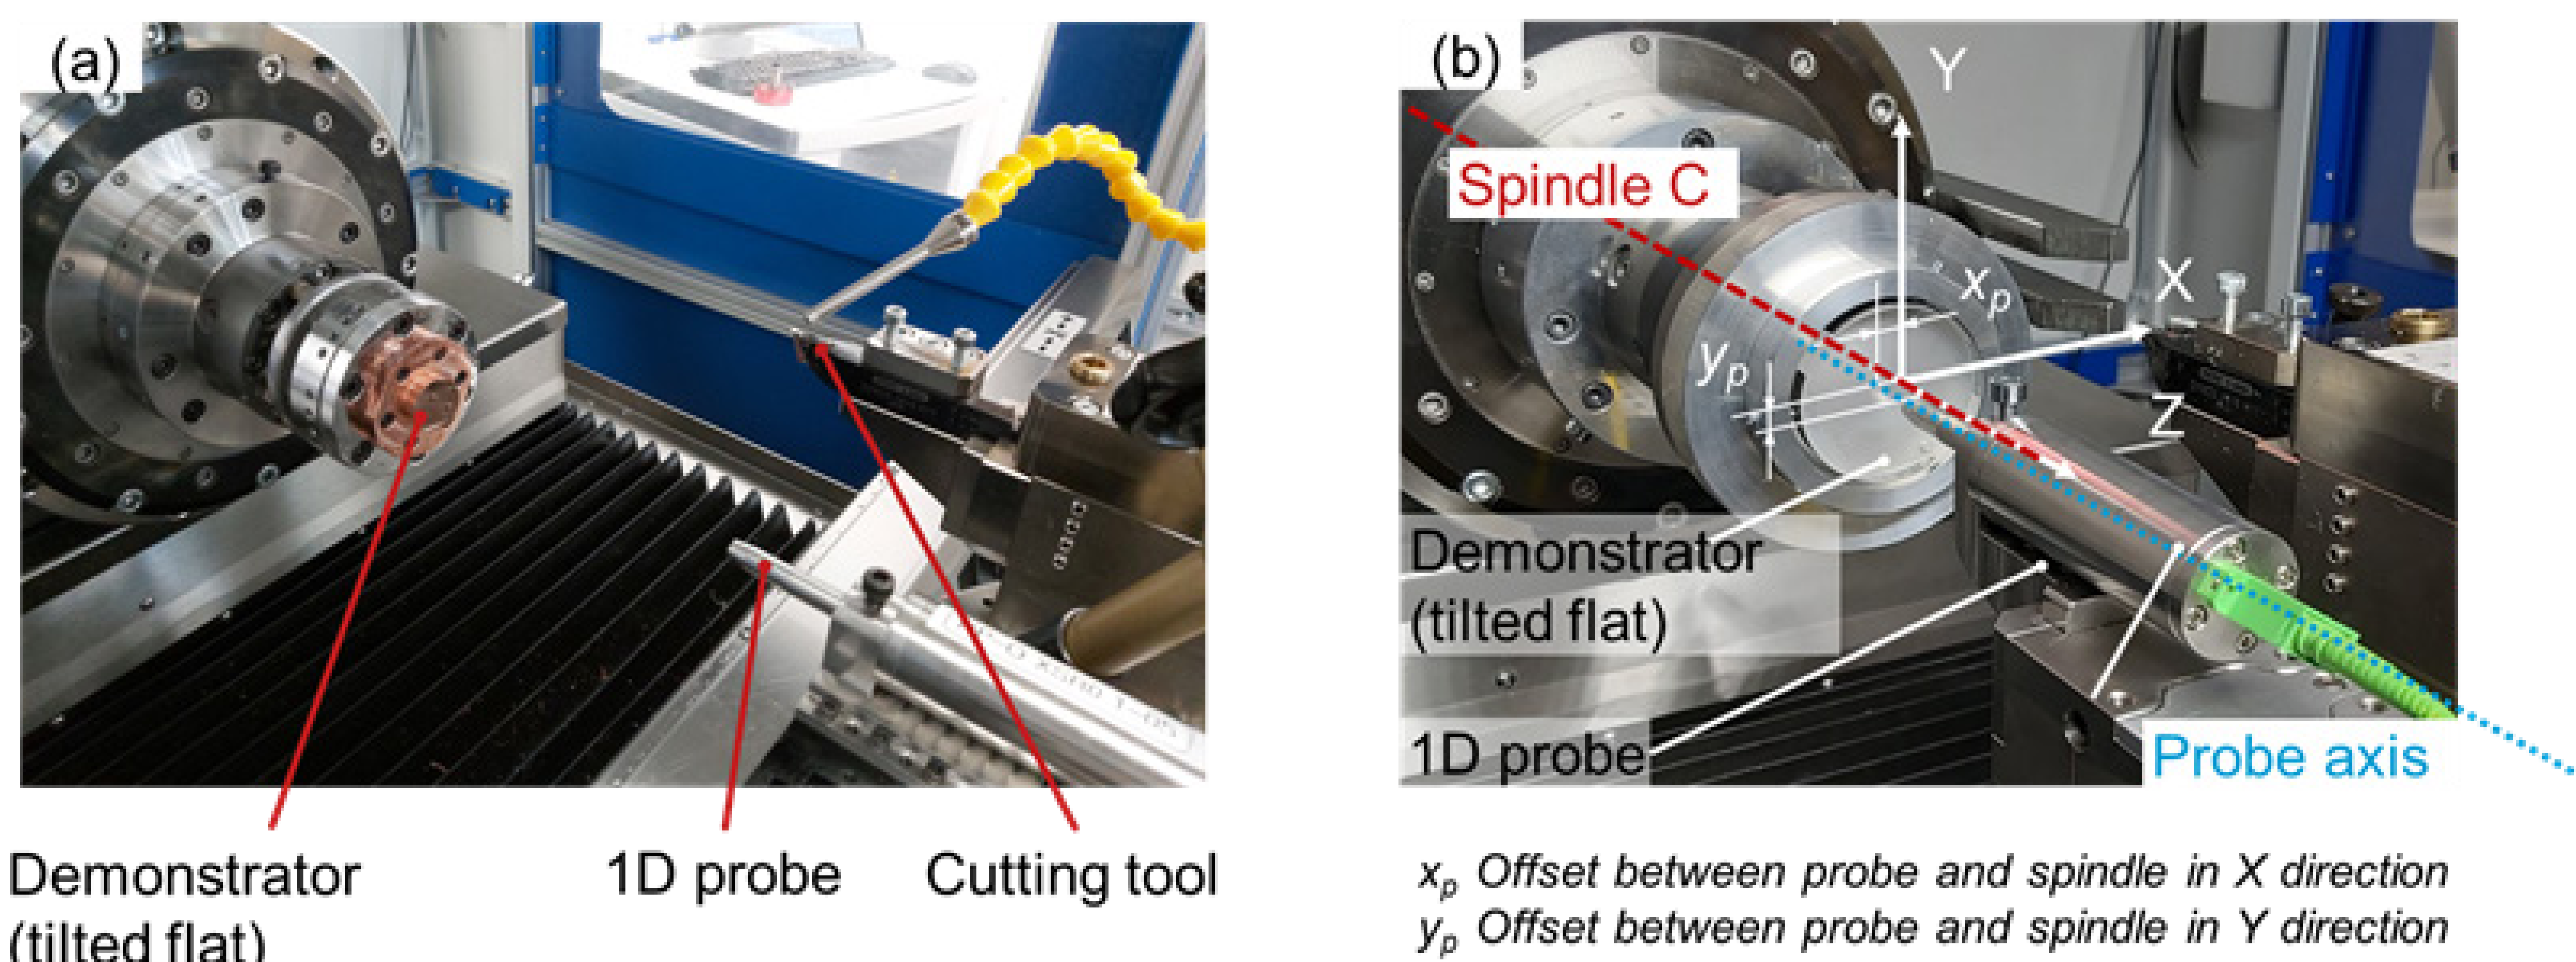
(a) The on-machine metrology system, integrated on an ultra-precision turning machine. (b) The probe offsets in X and Y direction with respect to the machine tool coordinate system.
